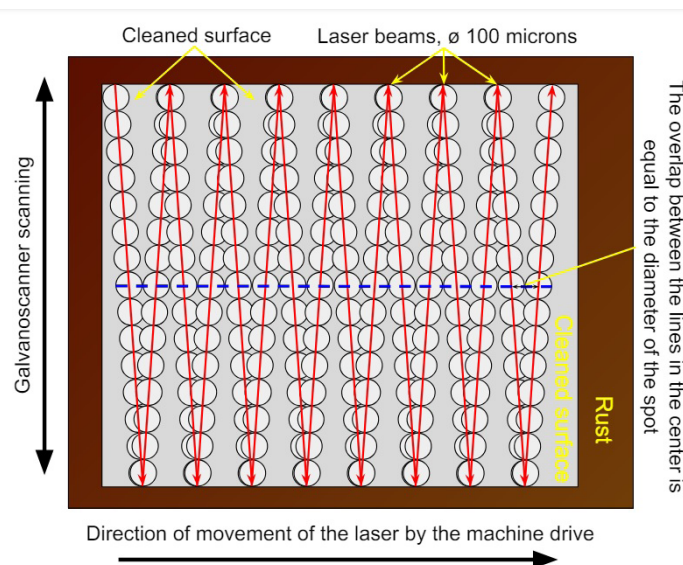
Scheme of forming a processing strip with a single pass of laser cleaning
